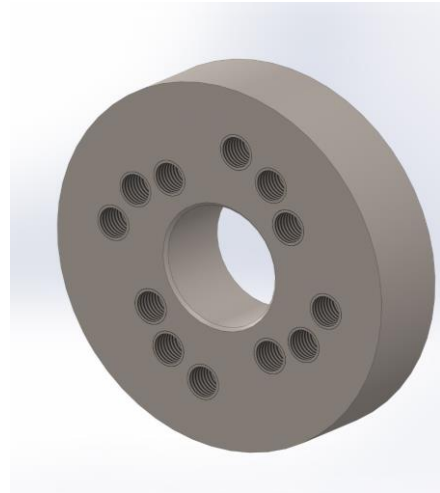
Hub Attachment for testing Multiple sizes of Valves (2,2.5,3 inches).
